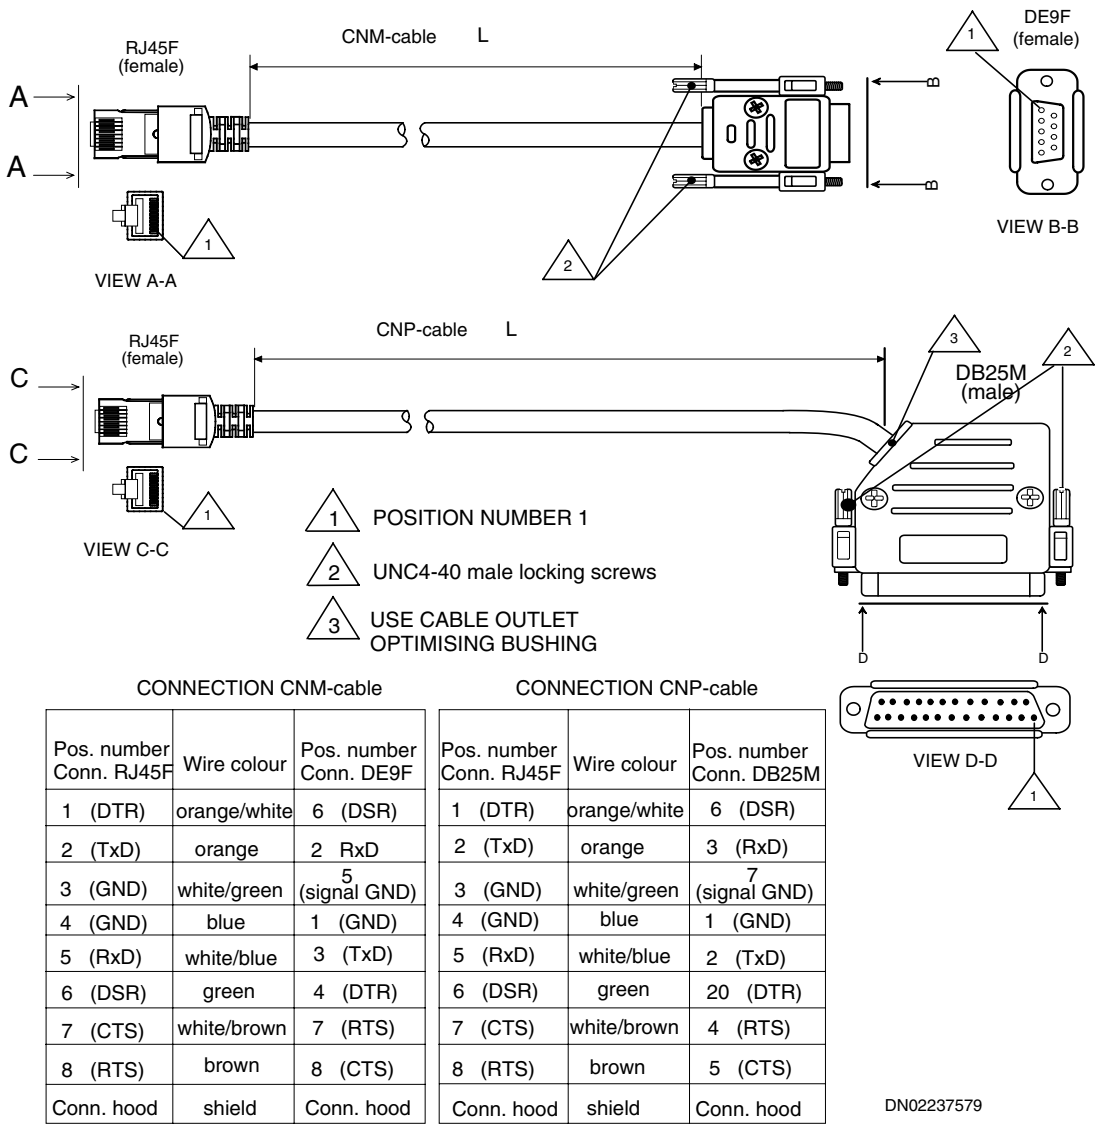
Peripheral cables; CNM for VDU and CNP for printer LPT.
